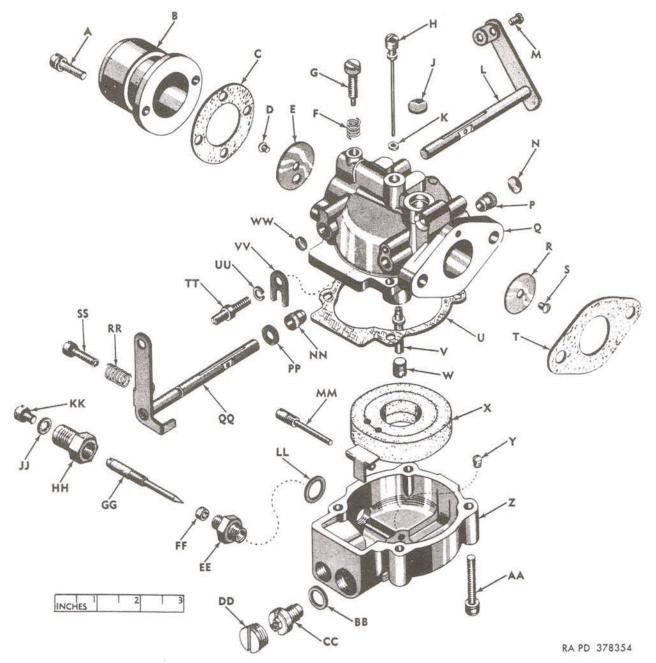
Carburetor-exploded view (inlet needle valve and valve spring not shown).
